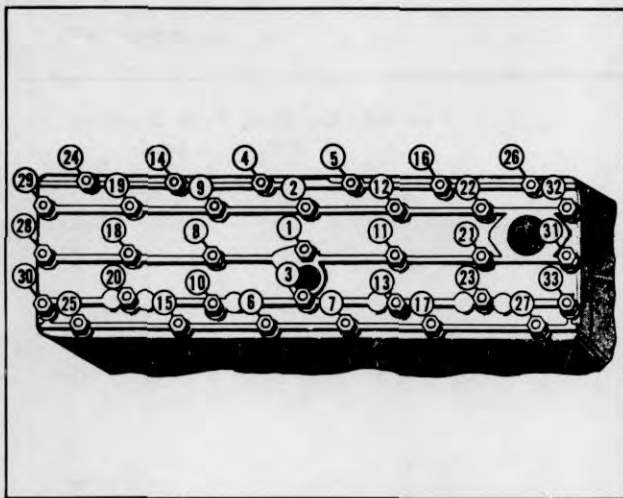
Cylinder Head Stud Nut Tightening Sequence
